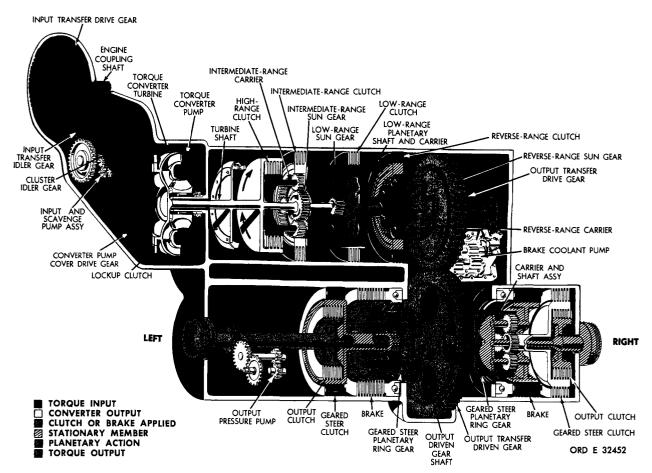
Reverse 1-gear, full-right-steer torque path, converter operation
